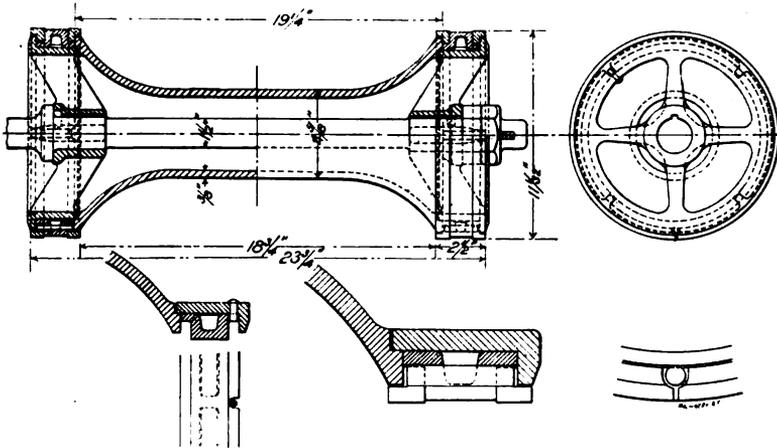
Piston Valve for Express Passenger Locomotive, Atlantic Type
